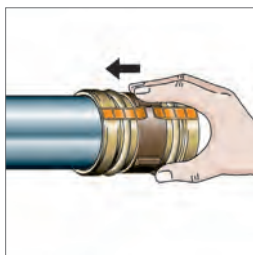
Ensure the proper seat of sealing element and cutting ring.
